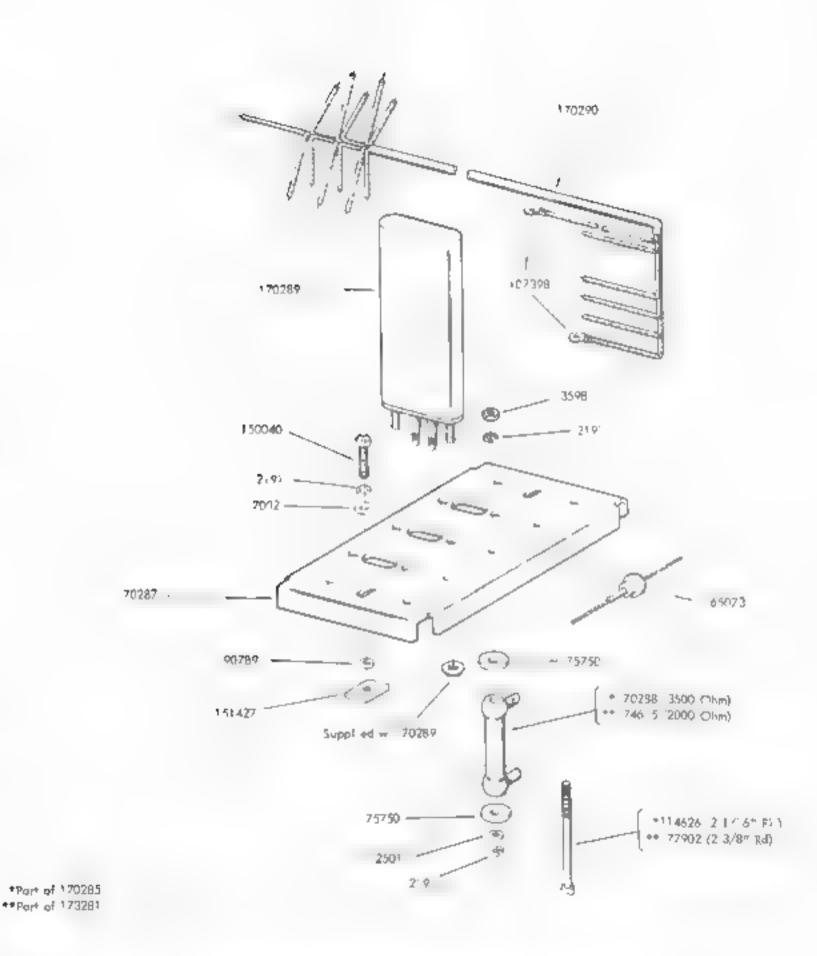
170285 AND 173281 RESISTOR ASSEMBLIES
